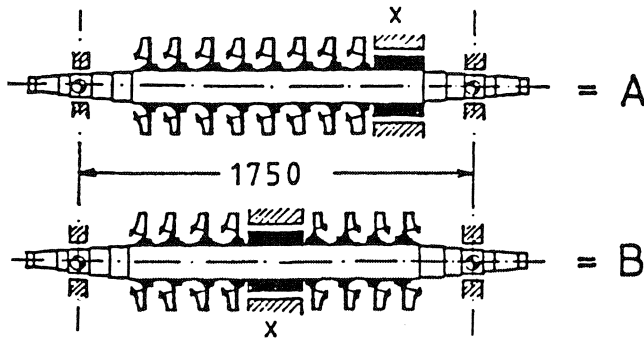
(A) Flow-through or Series and (B) Back-to-Back or Parallel Compressor Designs [2].
